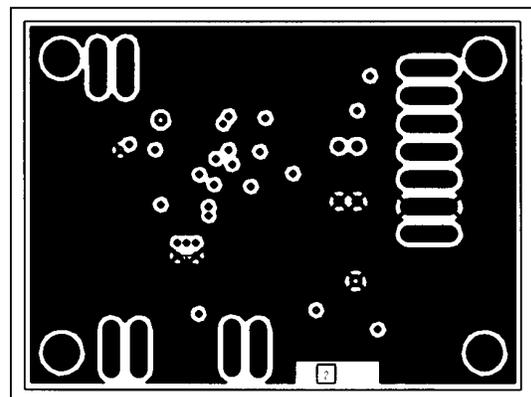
MAX624 PC Board Layout—VSWITCHED Plane
